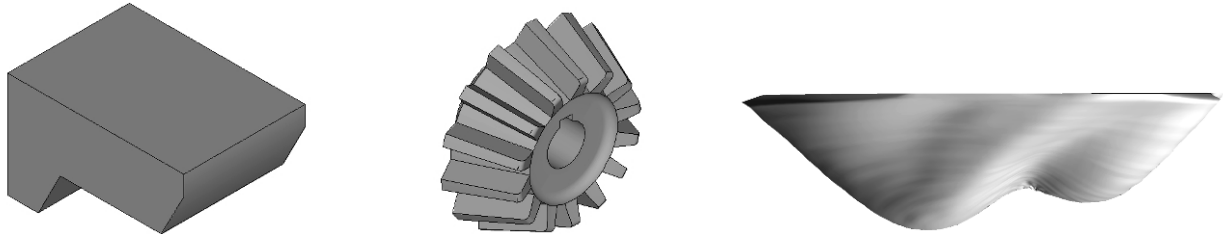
Experimental Data. a) Spacer, b) bevel gear, c) molding cast.
